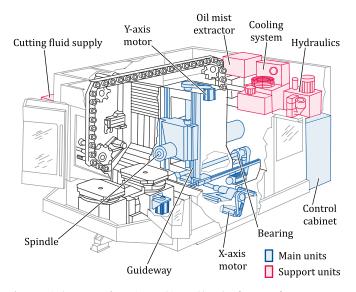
Typical structure of a cutting machine tool based on [59,77,200].
